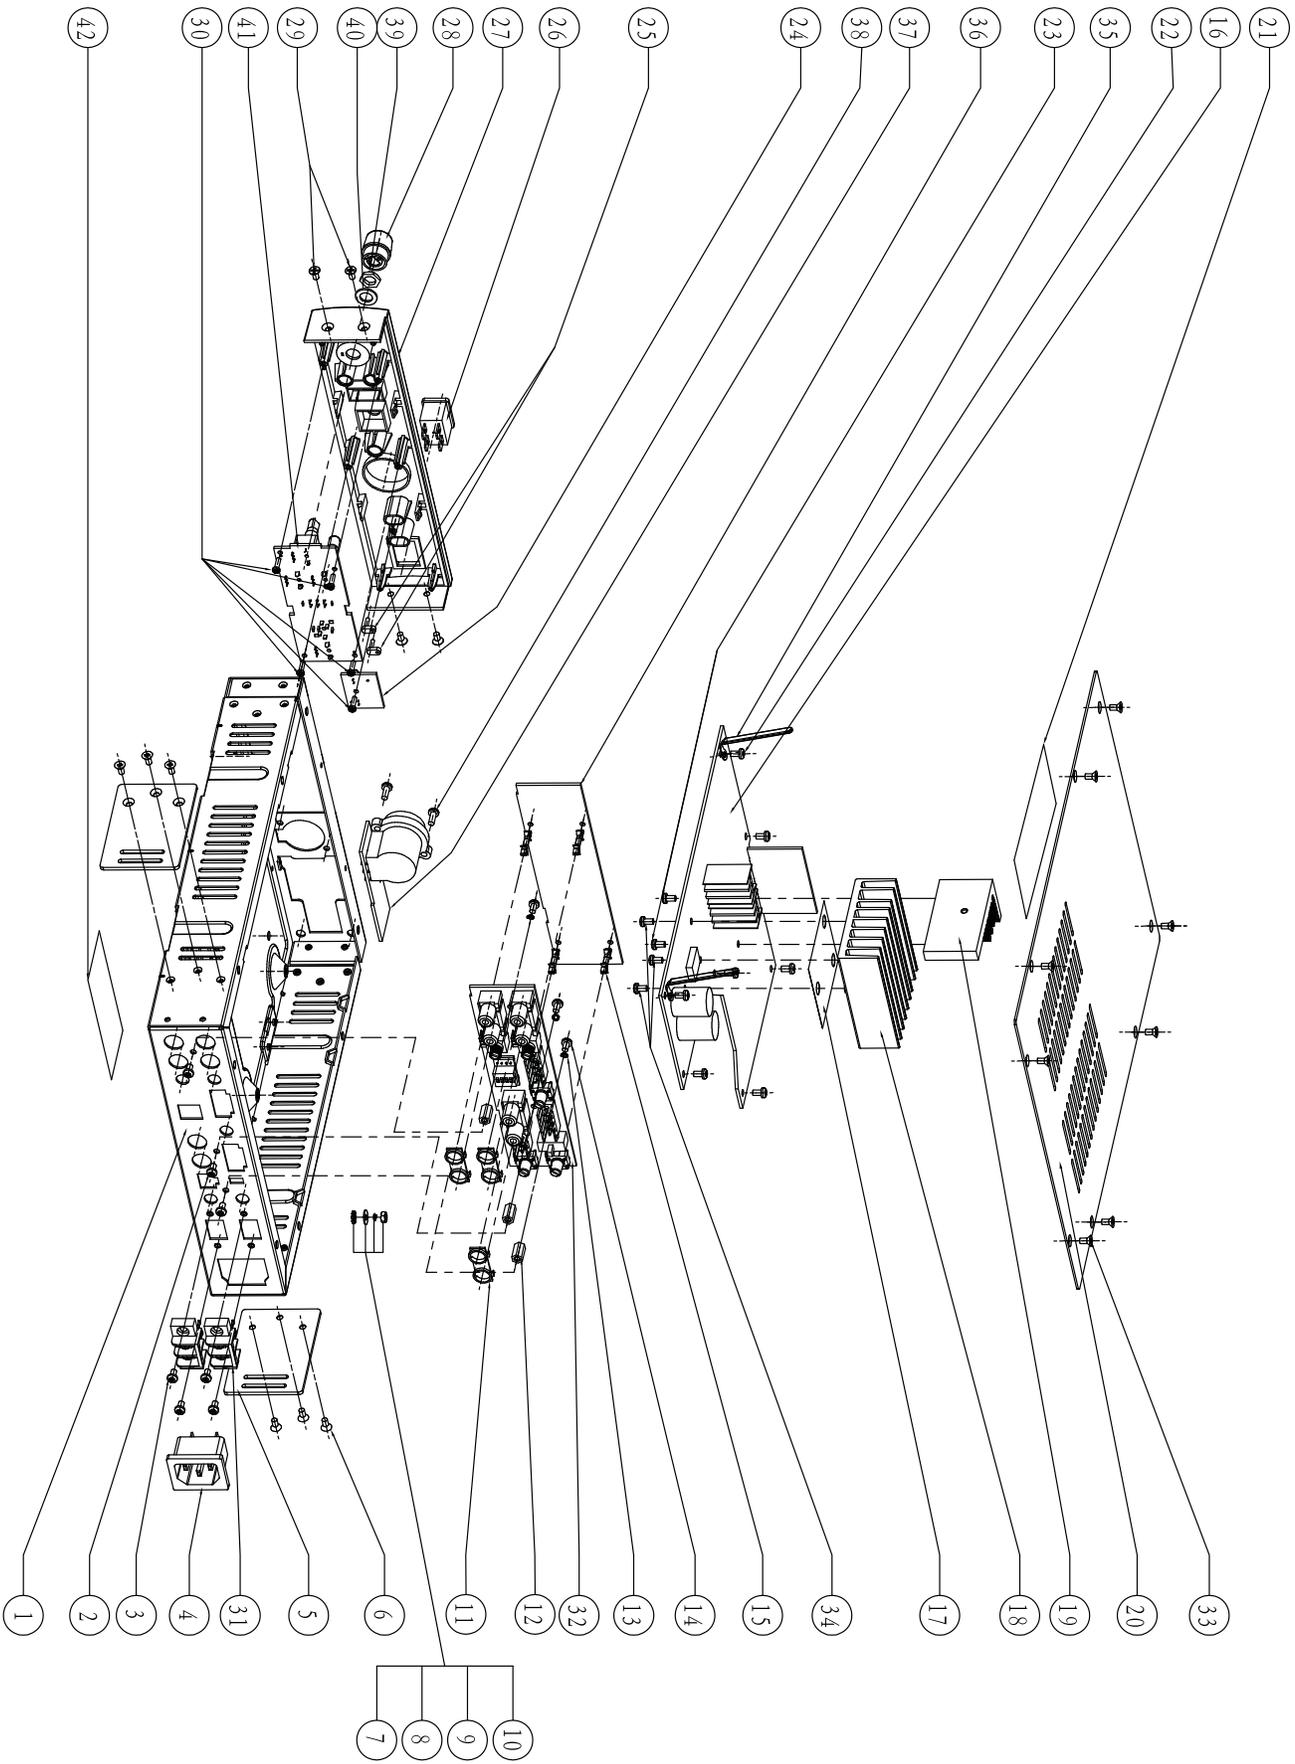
FreeSpace® IZA 250-LZ Amplifier Exploded View
